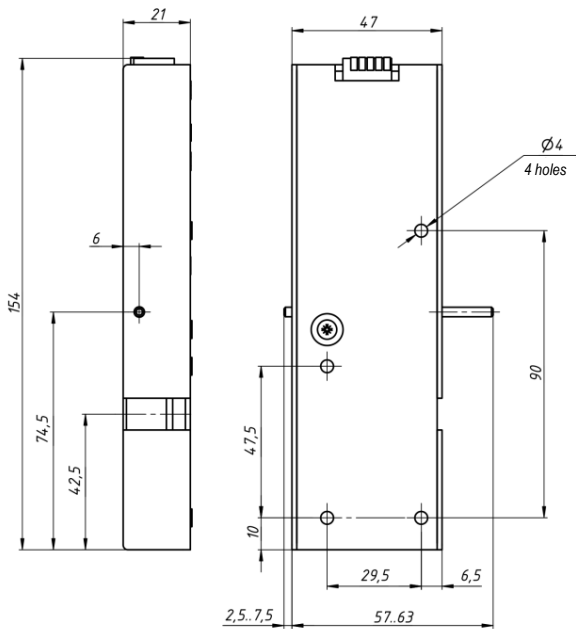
Promix-SM.323 lock overall and mounting dimensions
